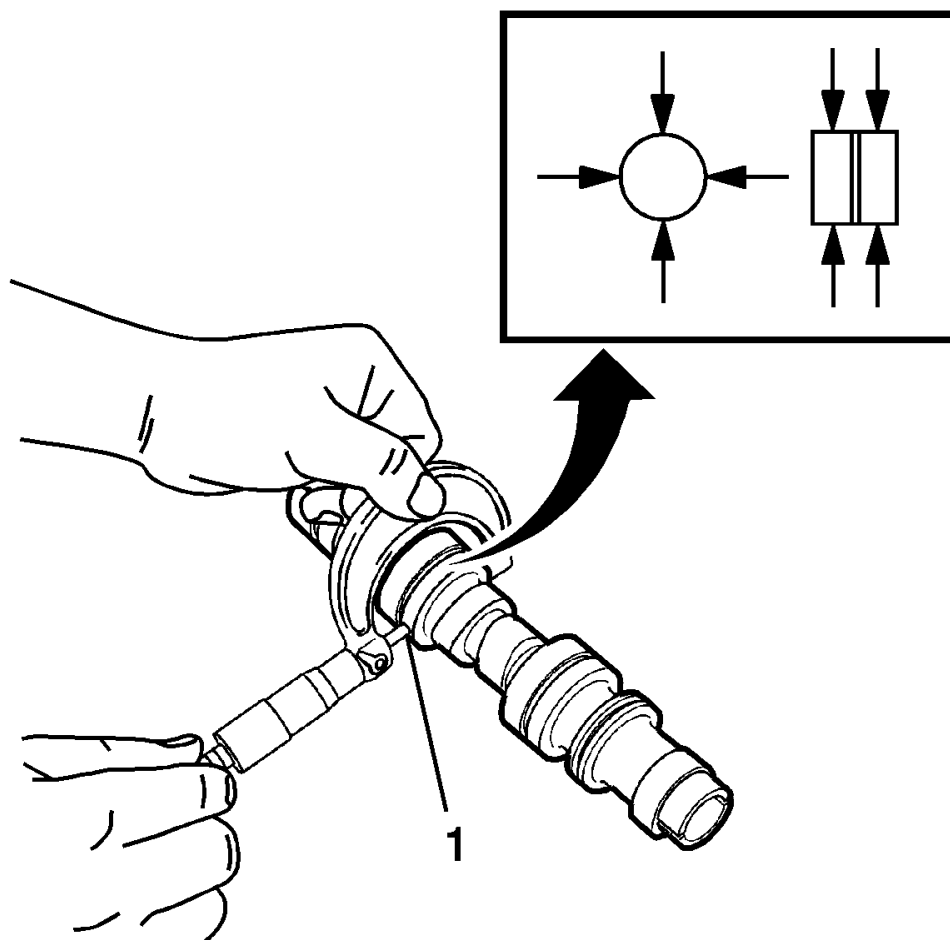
Measuring Outer Diameter Of Camshaft Journals
